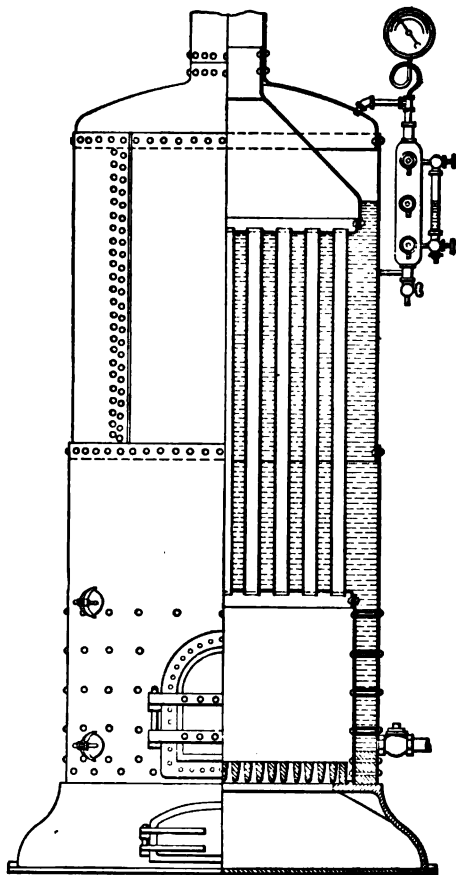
Upright or Vertical Boiler with submerged tube-sheet.
